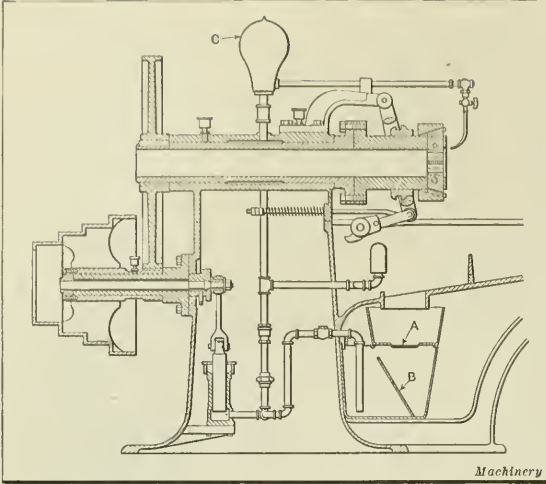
Sectional View of Bolt Threader built by National Machinery Co., showing Means of distributing and purifying Cutting Compound
